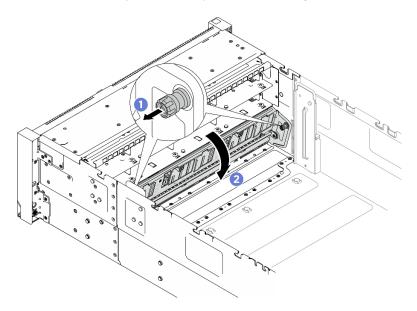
Removing drive backplane carrier assembly (E3.S bay chassis)
